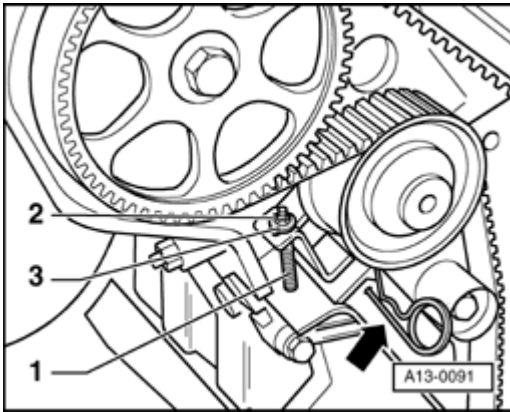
Screwing Stud Into Toothed Belt Tensioning Element & Hex Nut Onto Stud Using Large Washer
